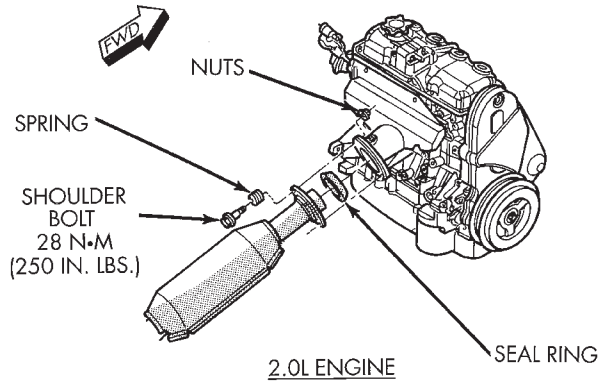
Exhaust Pipe Mounting To Exhaust Manifold
